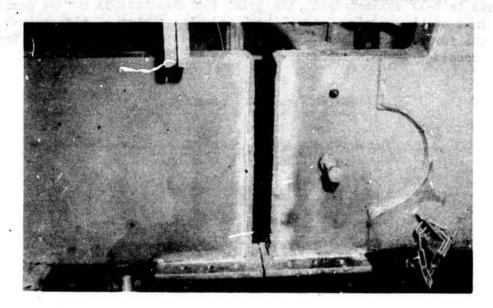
CUT READY FOR BUTT-PIATE (SECONDARY UNIT)
